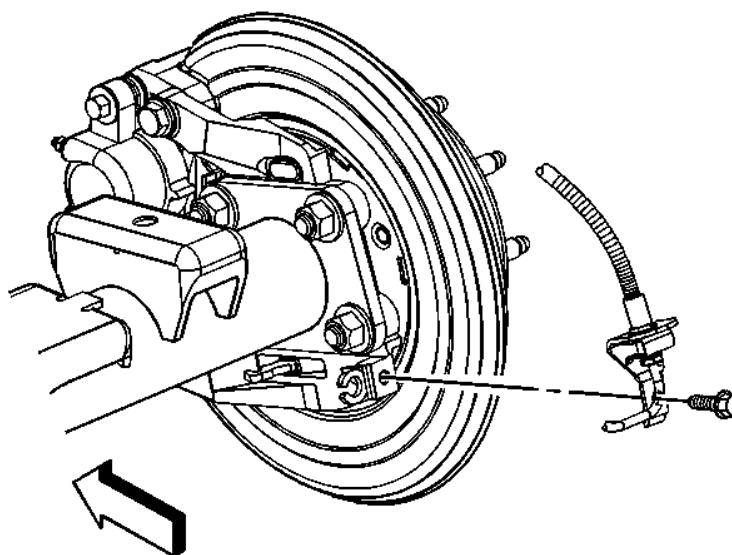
Disconnecting Brake Pipe Fitting Bracket From Brake Assembly
